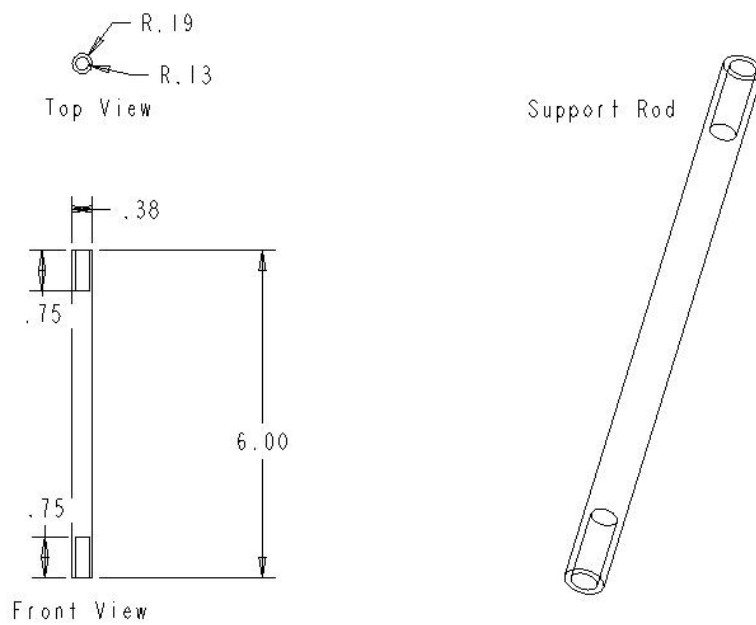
Engineering Drawings for Support Rod for the Turbine assembly
